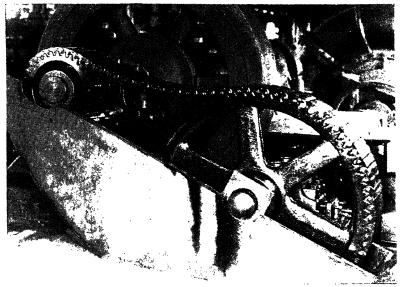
Chain drive. The chain transmits 200 hp from an oil engine to a centrifugal pump. The upper cover is removed to show the working parts. (Morse.)
